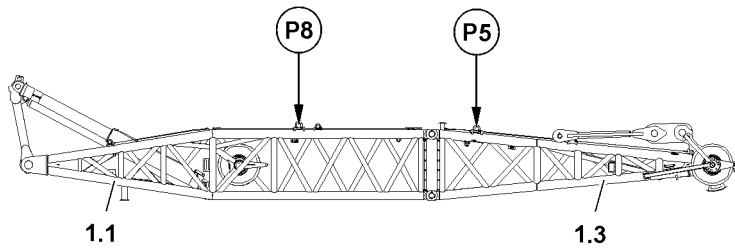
Fastening points for WA-frame 1 completely installed, short version
